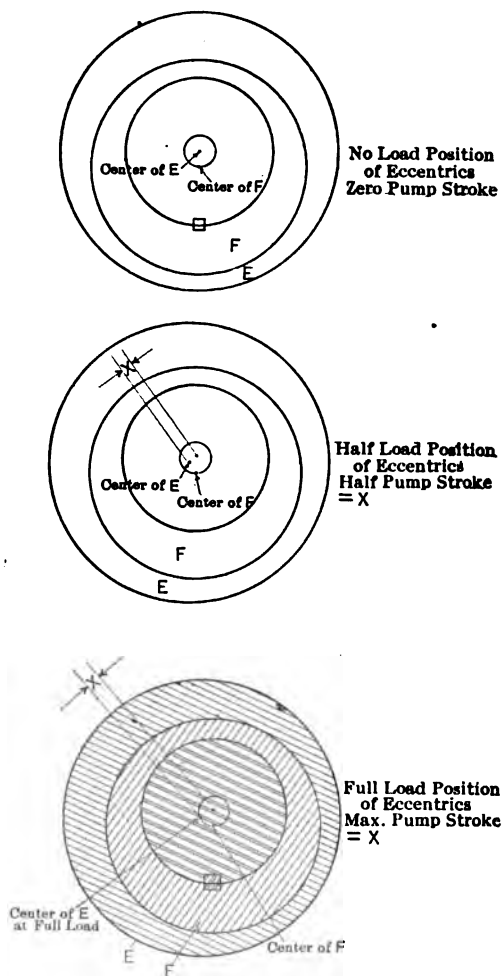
McIntosh & Seymour Diesel eccentric movements.
